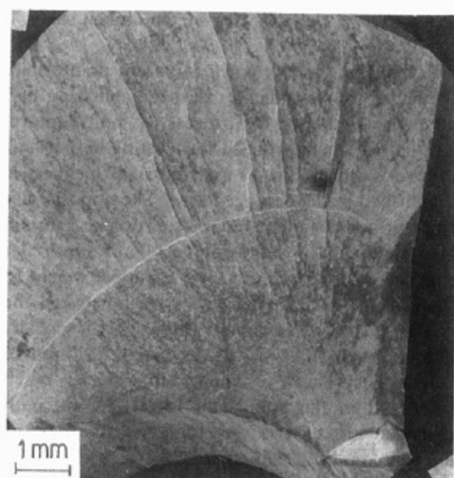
Edges of joining of fatigue cracks propagating in different parallel levels.
